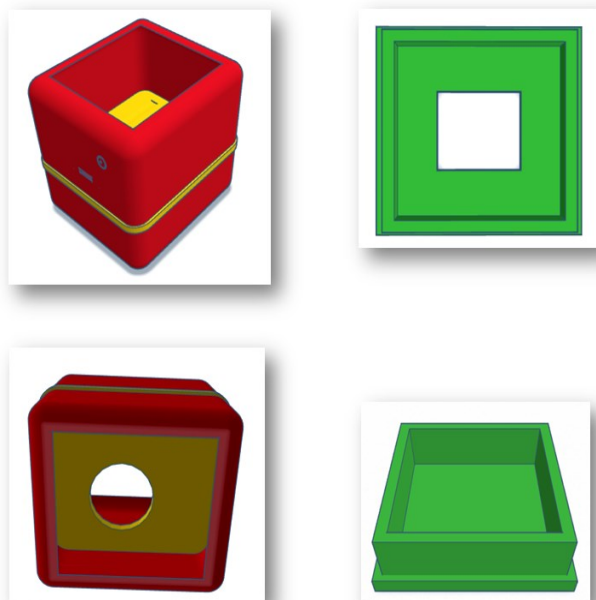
Different views of a 3D printed customized design of device container using Autodesk Tinker CAD
